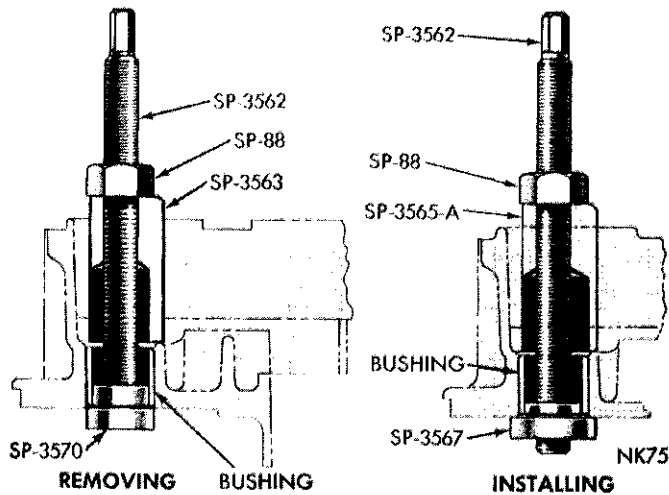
Removing and Installing Pinion Housing Drive Shaft Bushing
